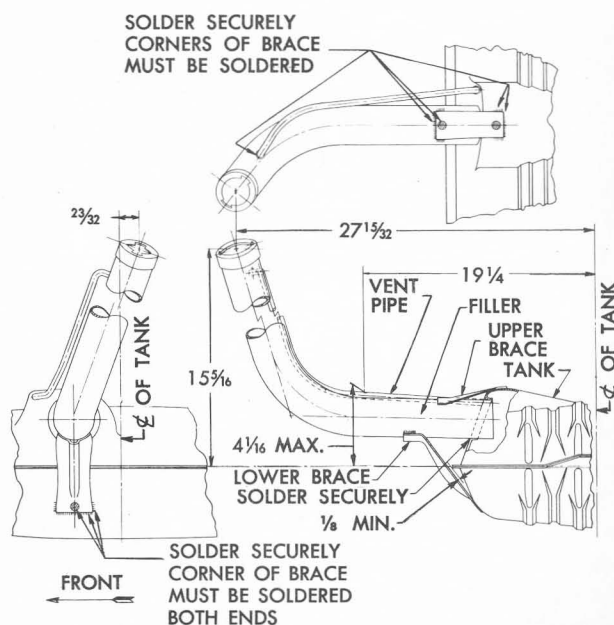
Location Dimensions for Gasoline Tank Filler—1949 Series 50-70
